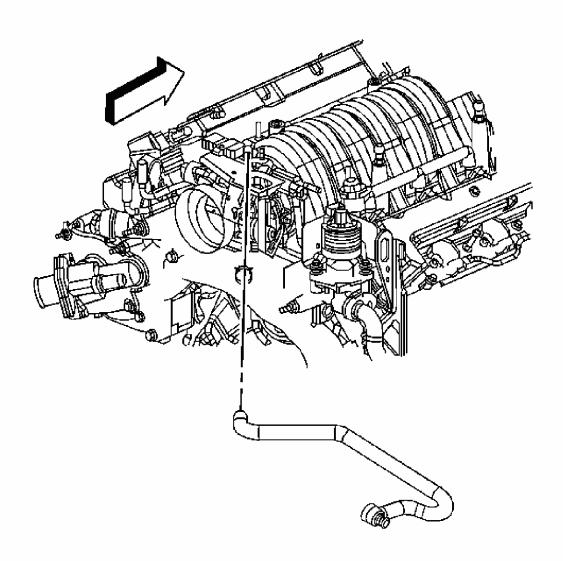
View Of Coolant Crossover Pipe Courtesy of GENERAL MOTORS CORP.
